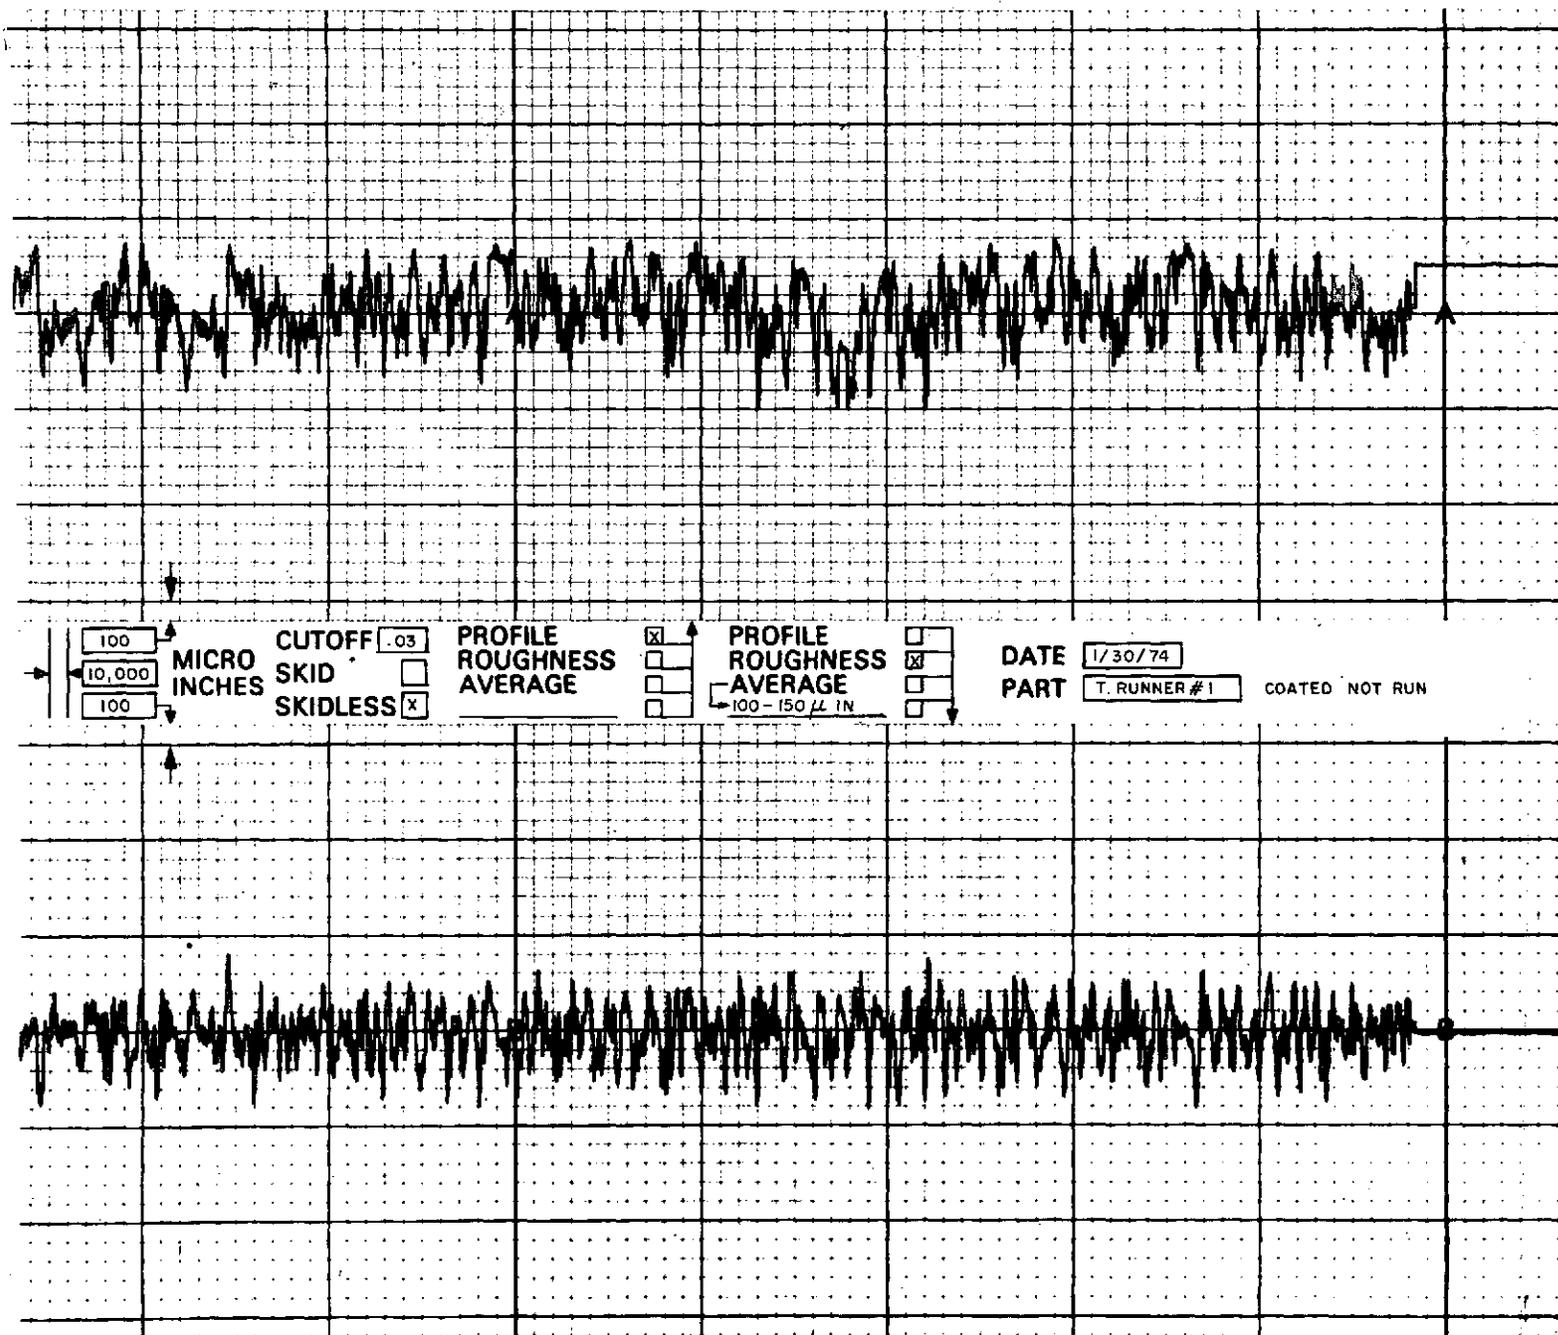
Surface Finish, Thrust Runner #1, as Received After MoS₂ Coating
